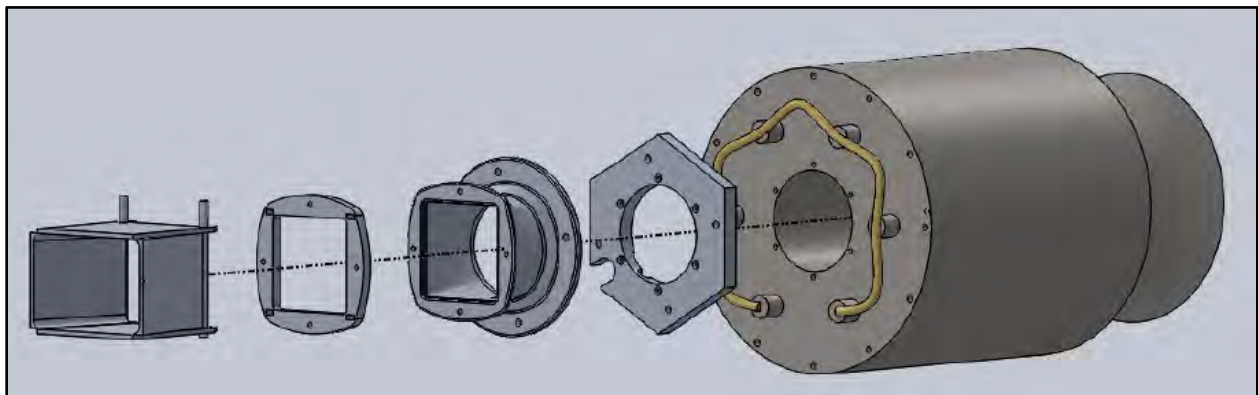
Assembly of all nozzle components, and attachment to the engine.
